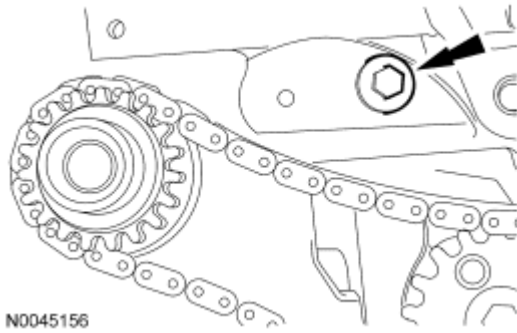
Locating Oil Pump Chain Drive Tensioner Shoulder Bolt
